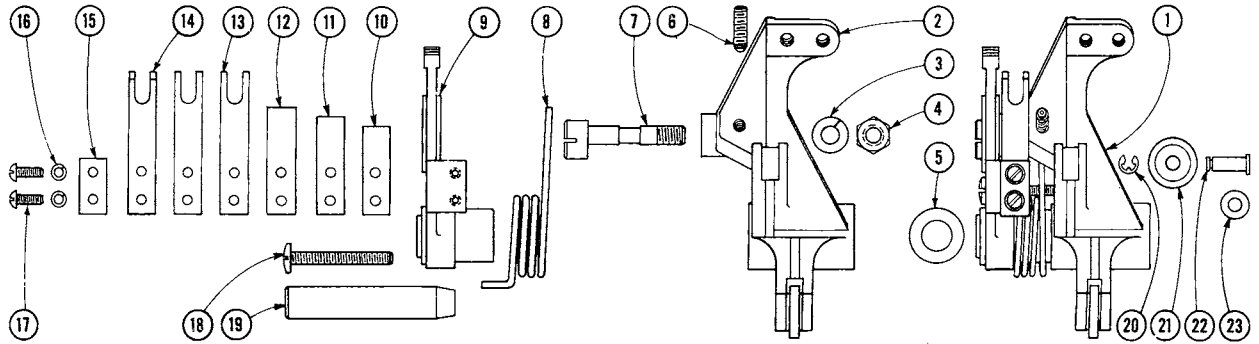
CAM FOLLOW ARM ASSEMBLY
